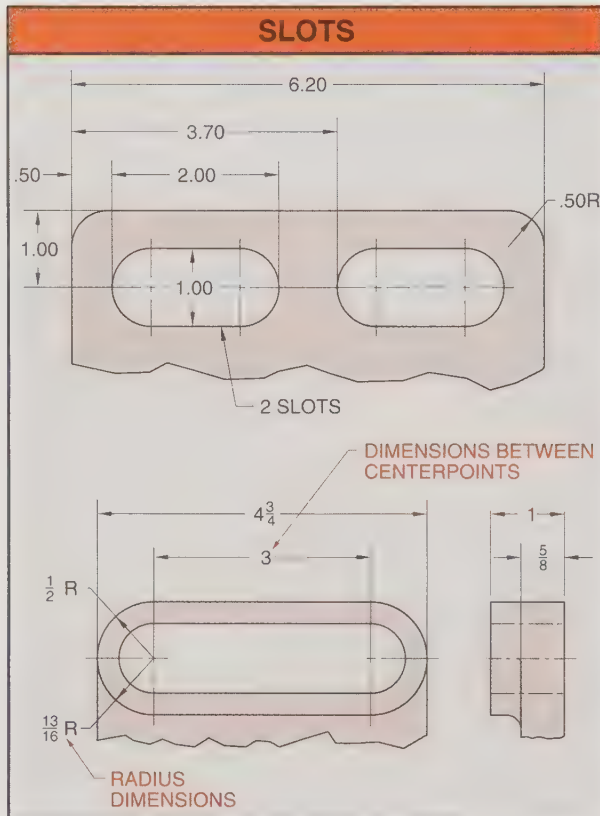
Slots are commonly machined to specifications using a milling machine.
